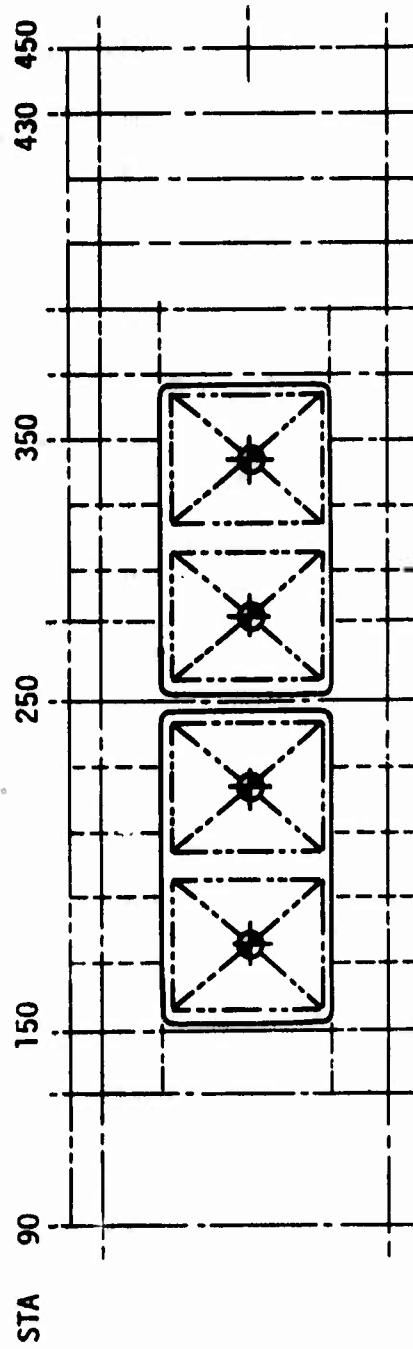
(U) Structural Arrangement for Single Row of Four 40 x 48 Cargo Pallet Exits.
